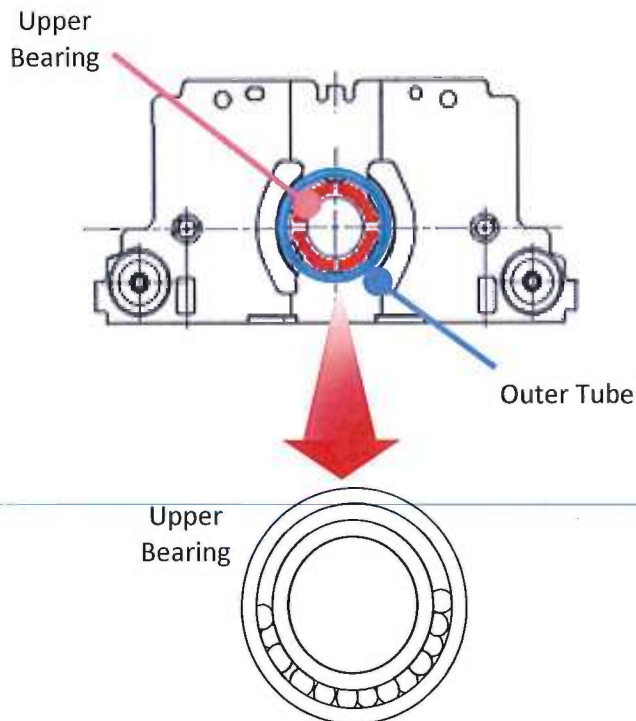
Steering column Cross Section/Upper Bearing & Bearing Retainer
